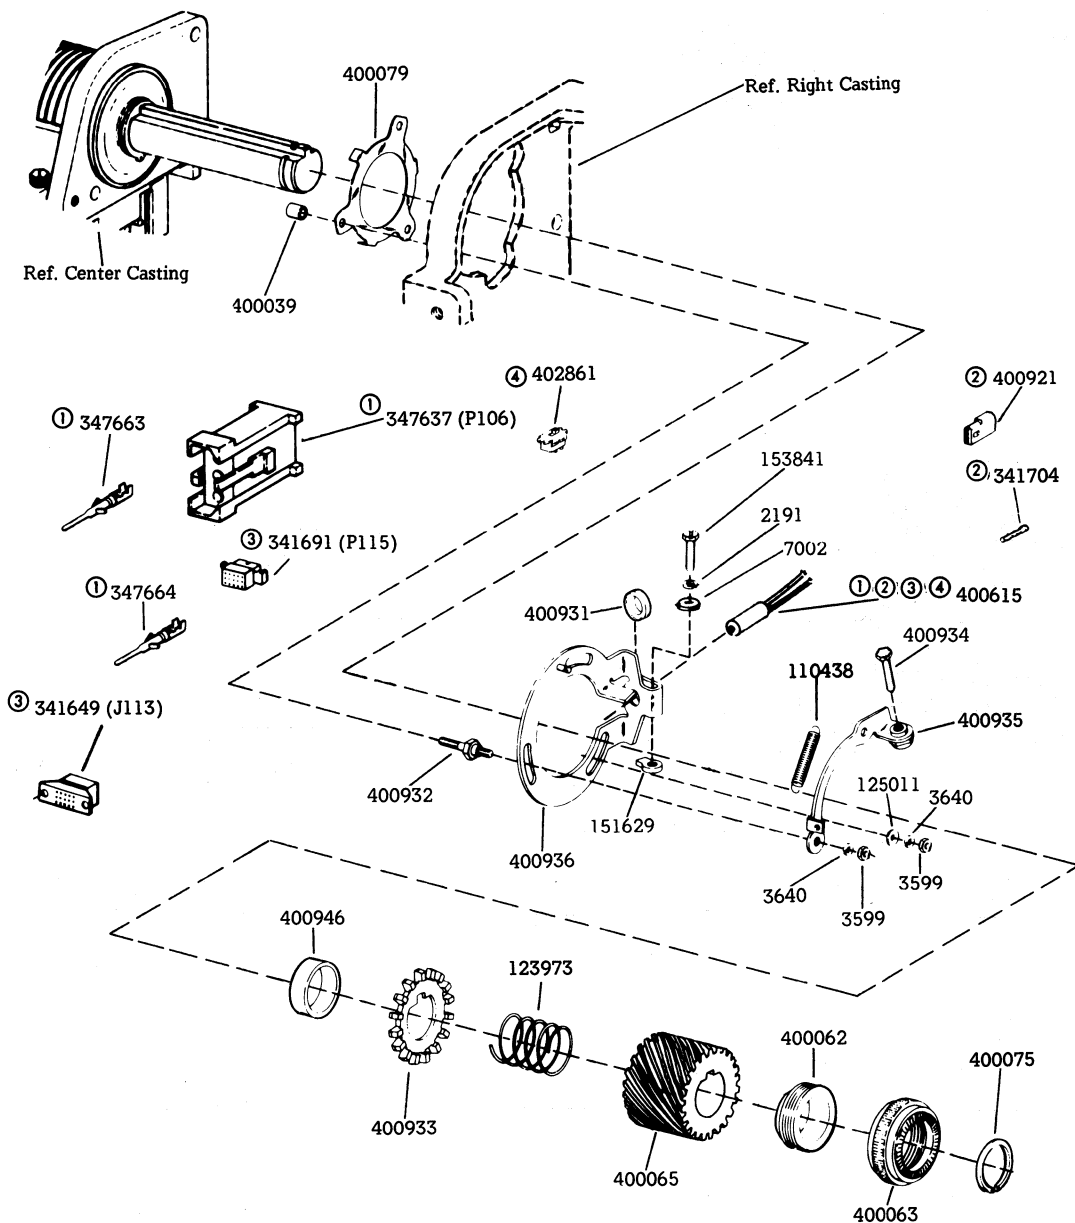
Right Casting Assembly (Forms Access - Tractor Feed)
